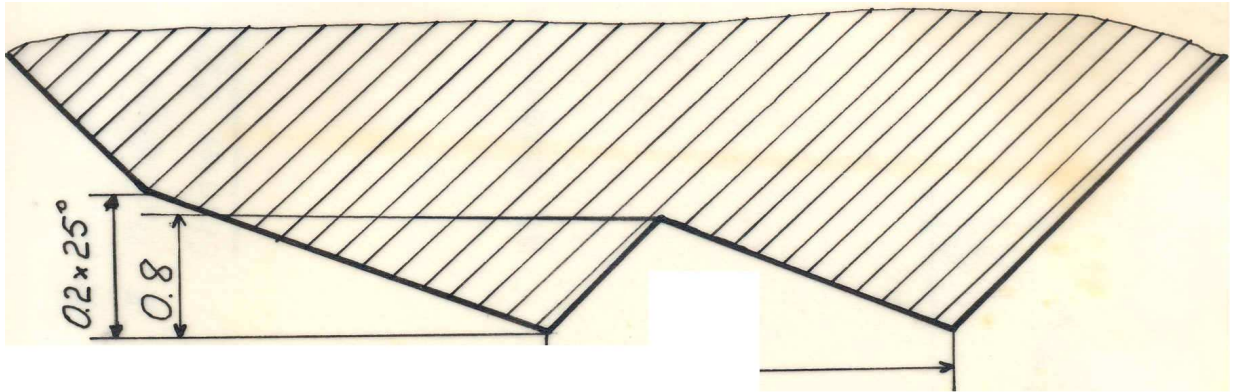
Feed mark at the end of cut. Cold drawn machined at300m/min.
